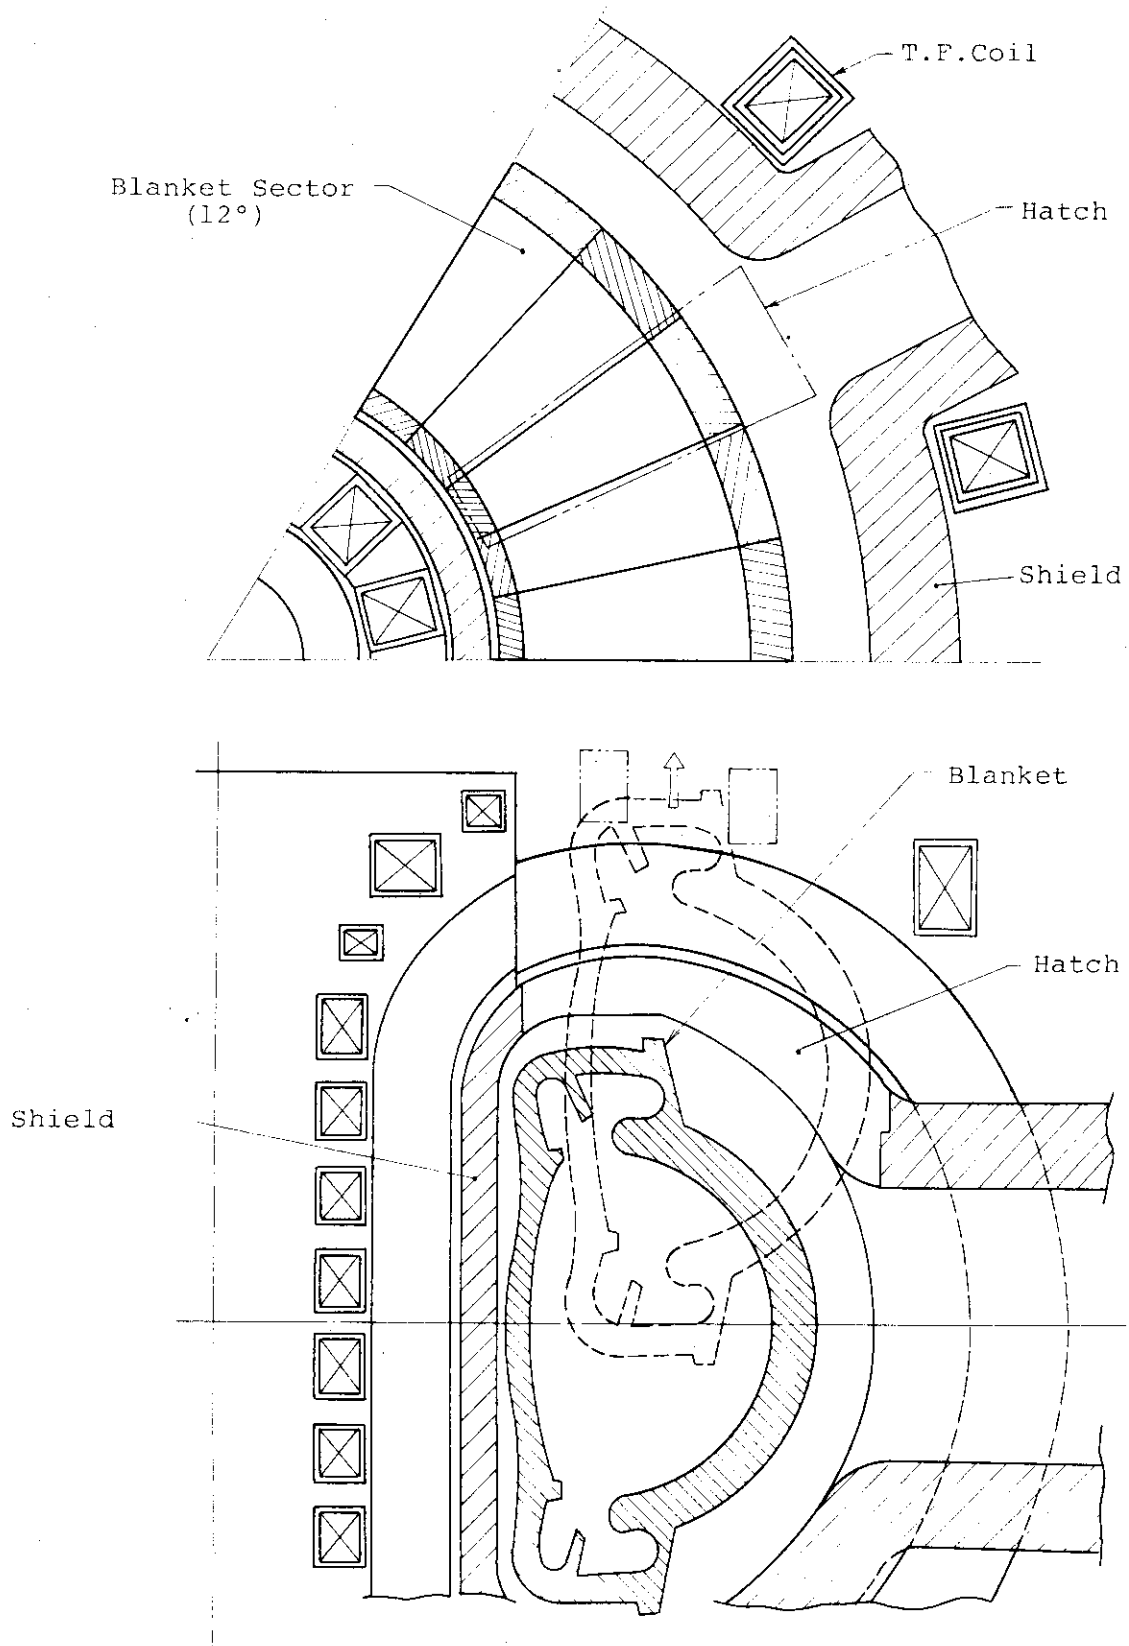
Hatch on the Shielding Structure in the Removable Blanket Scheme
